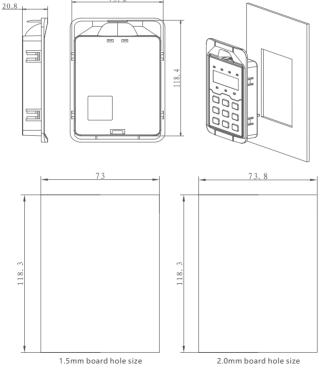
Display box cabinet door installation dimensions (with pallet installation)
